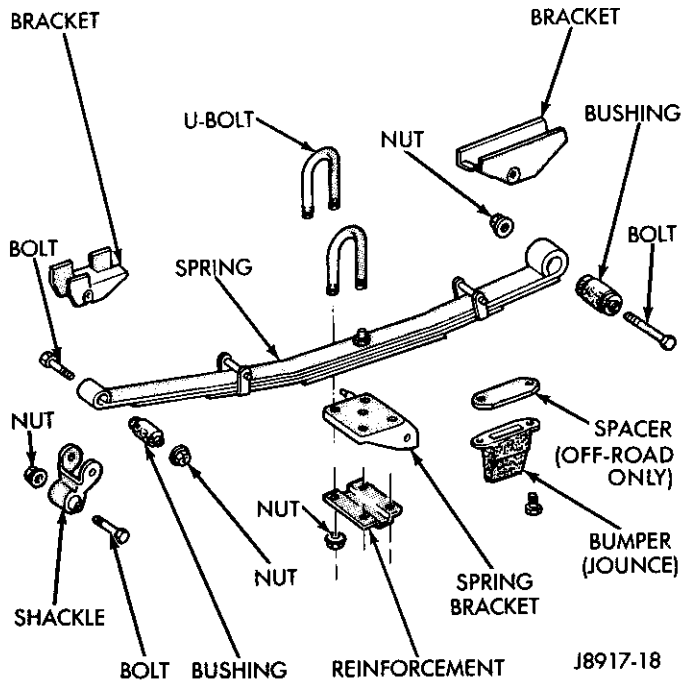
Rear Spring Removal/Installation—MJ Vehicles
